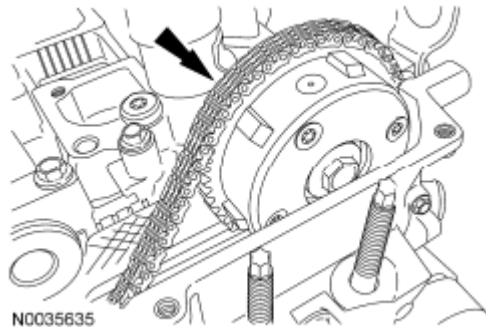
Locating Timing Chain On Intake Camshaft Drive Gear
